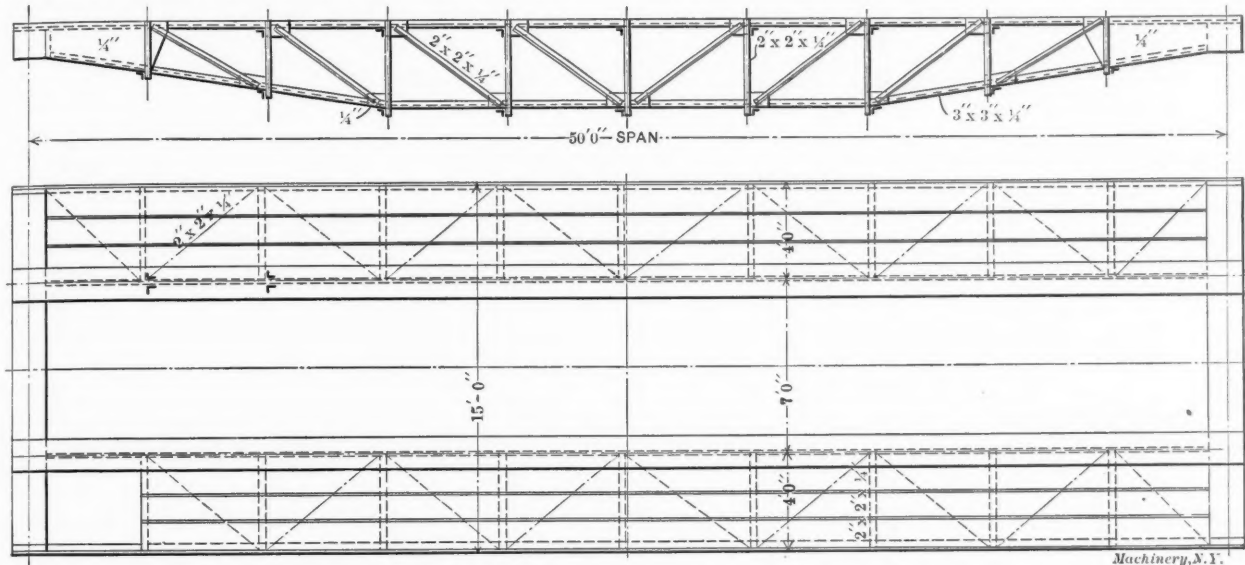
Web-plate Girder with Braced Platform Girder, added to insure Sufficient Strength for Wide Spans
